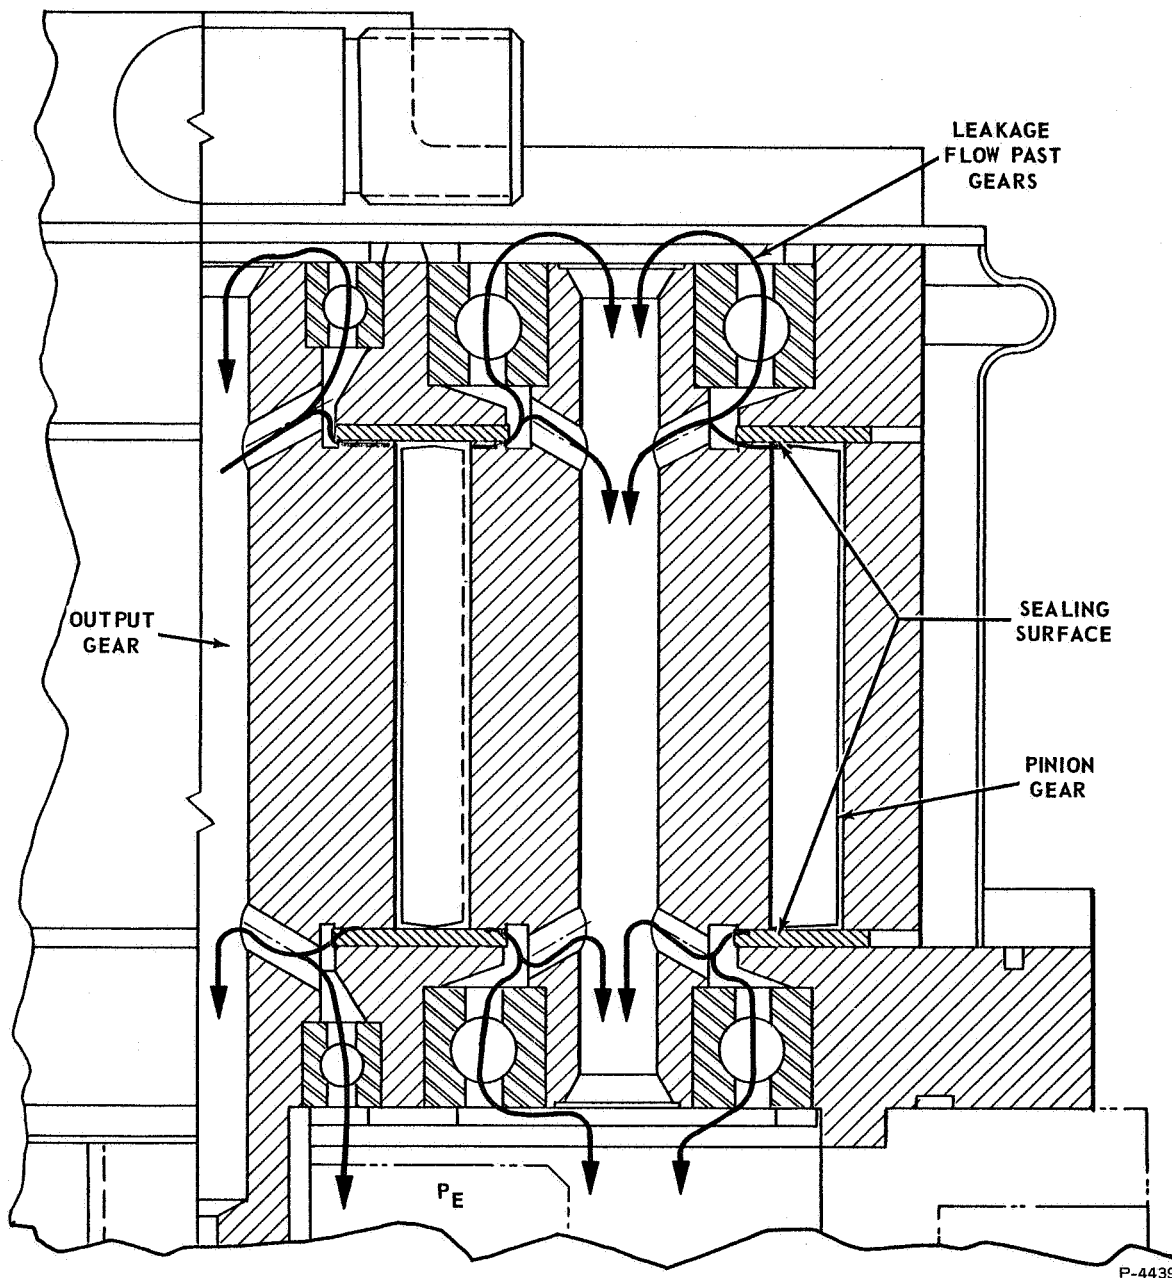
Pressure Balancing and Exhausting of Leakage Flow Past Sides of Gears
